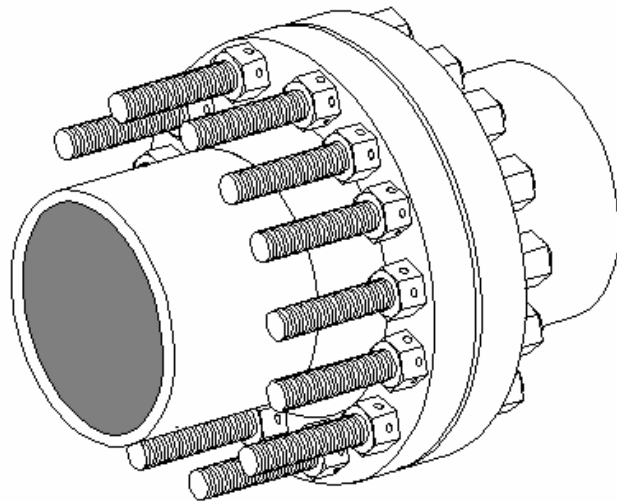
Stud bolt installation for 50% Tool coverage.
